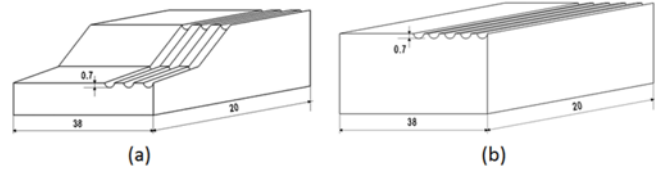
Two different tool paths: (a) straight lines and down-ramping, (b) slot machining
